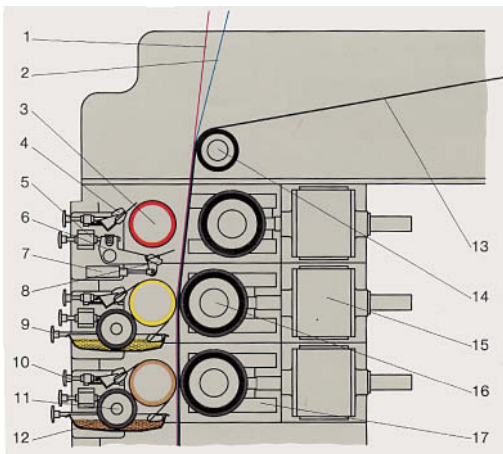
The printing machinery in a Saueressig-Portal roller printing press.
